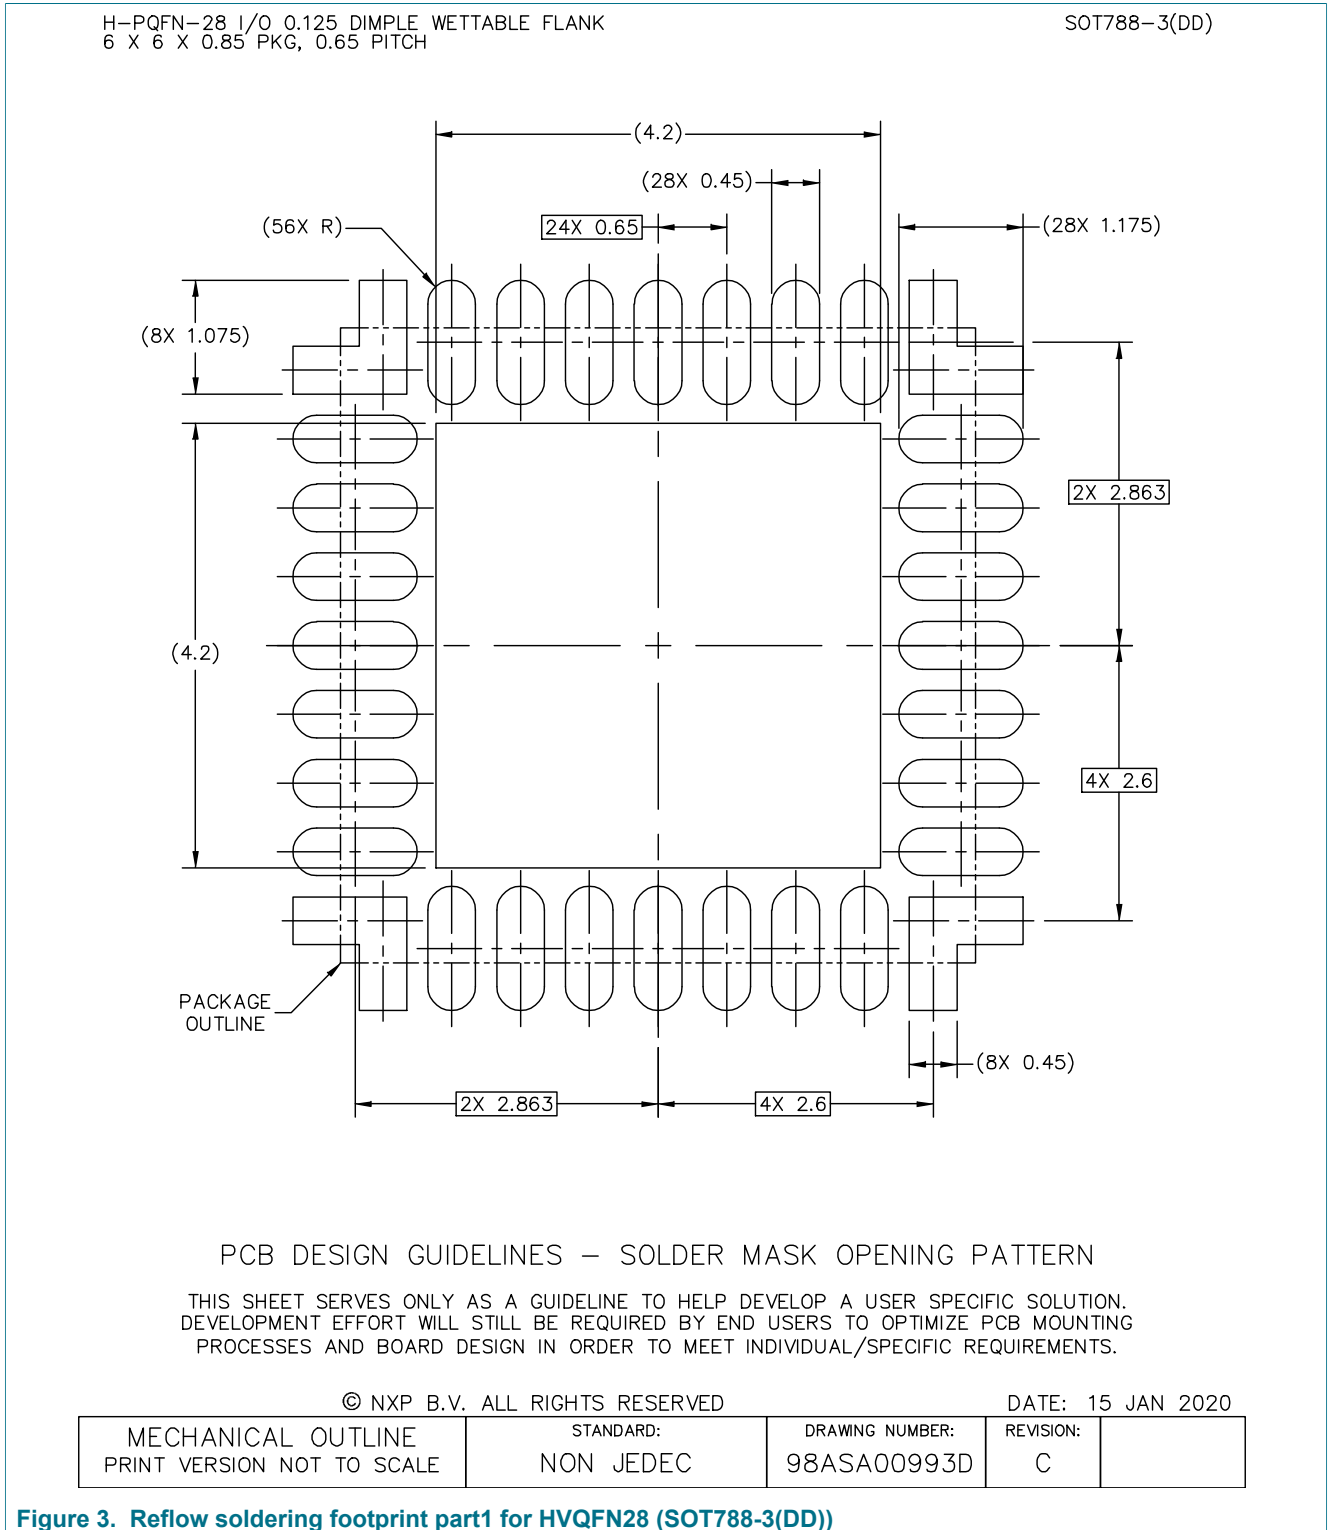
Reflow soldering footprint part1 for HVQFN28 (SOT788-3(DD))
